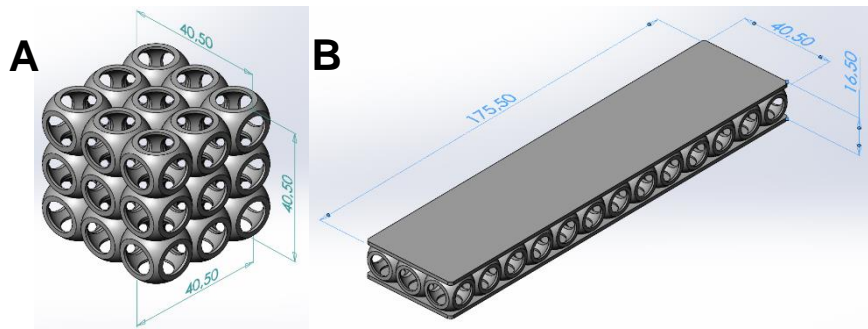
Examples of specimens designed (A) cubic compression specimen (B) bending sandwich panel specimen
